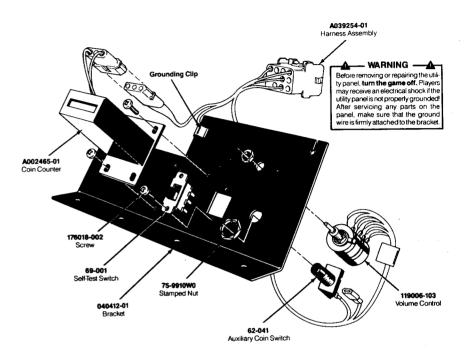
Utility Panel Assembly A040413-01 B Parts List
